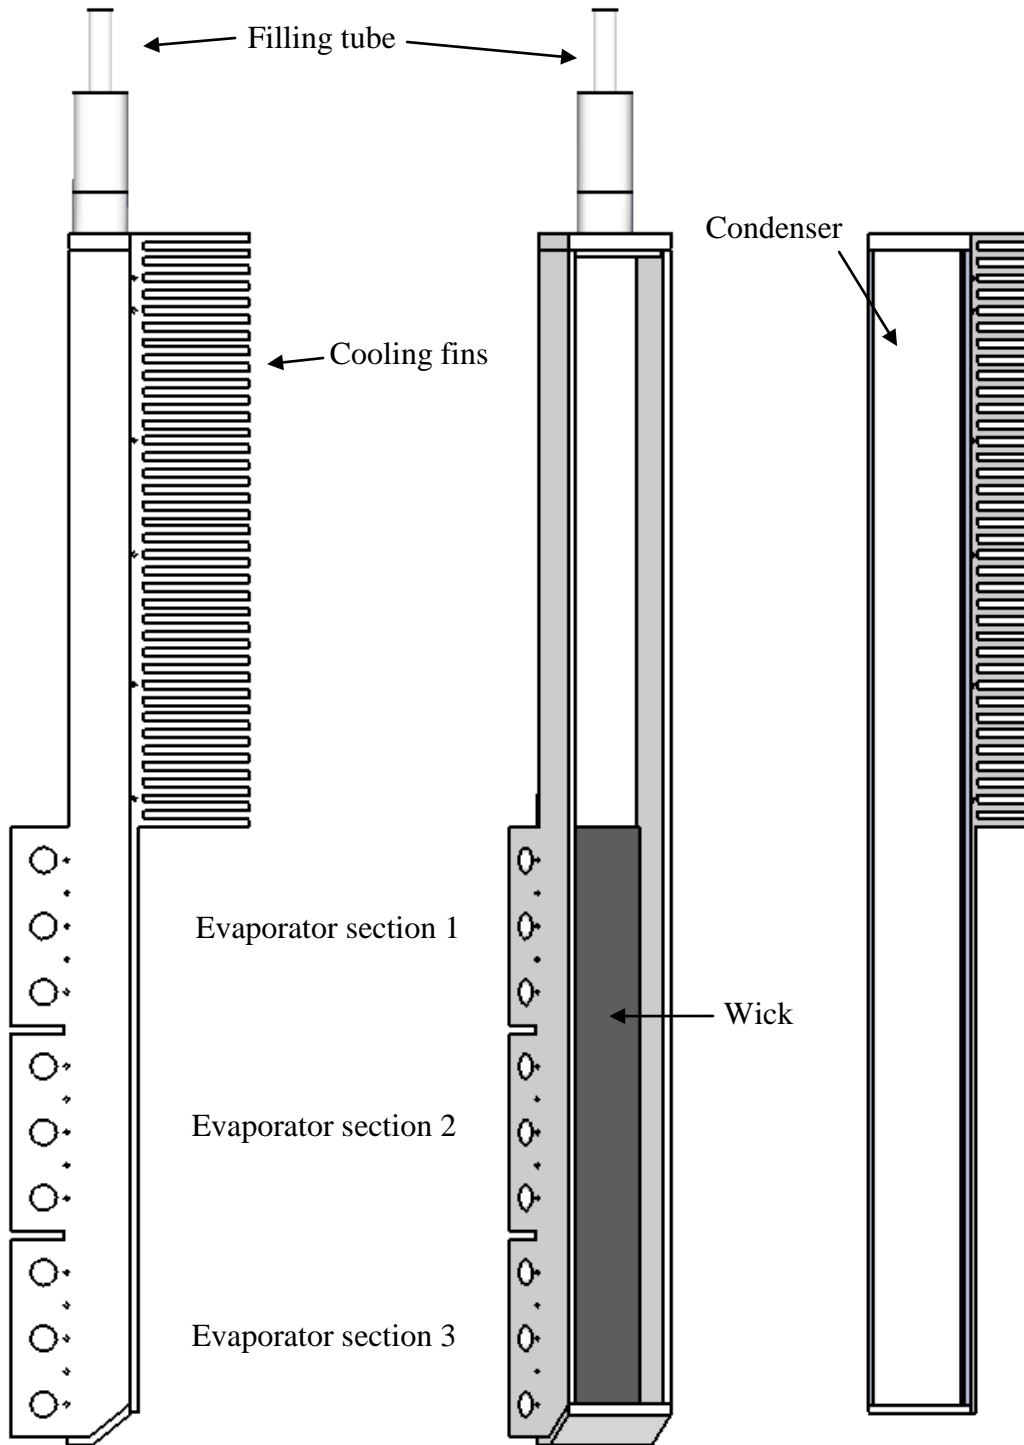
The hybrid heat pipe assembled (to the left) and in two parts (to the right)
